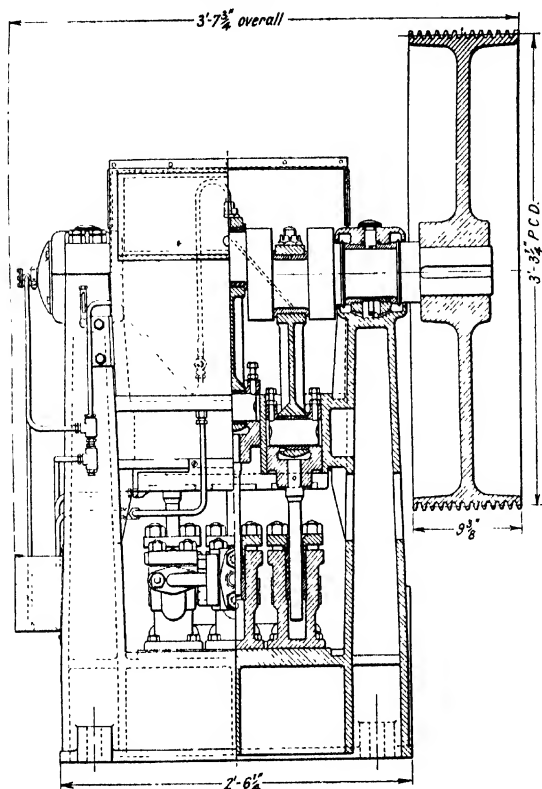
SECTIONAL ARRANGEMENT OF 1½-IN. DIAMETER BY
